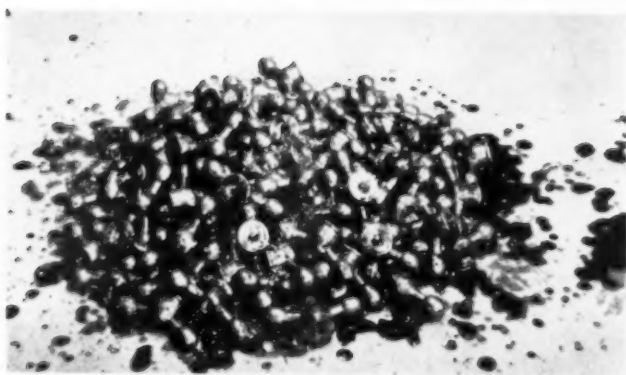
Fig. II. Machined brass castings with chips and a heavy coat of oil.
